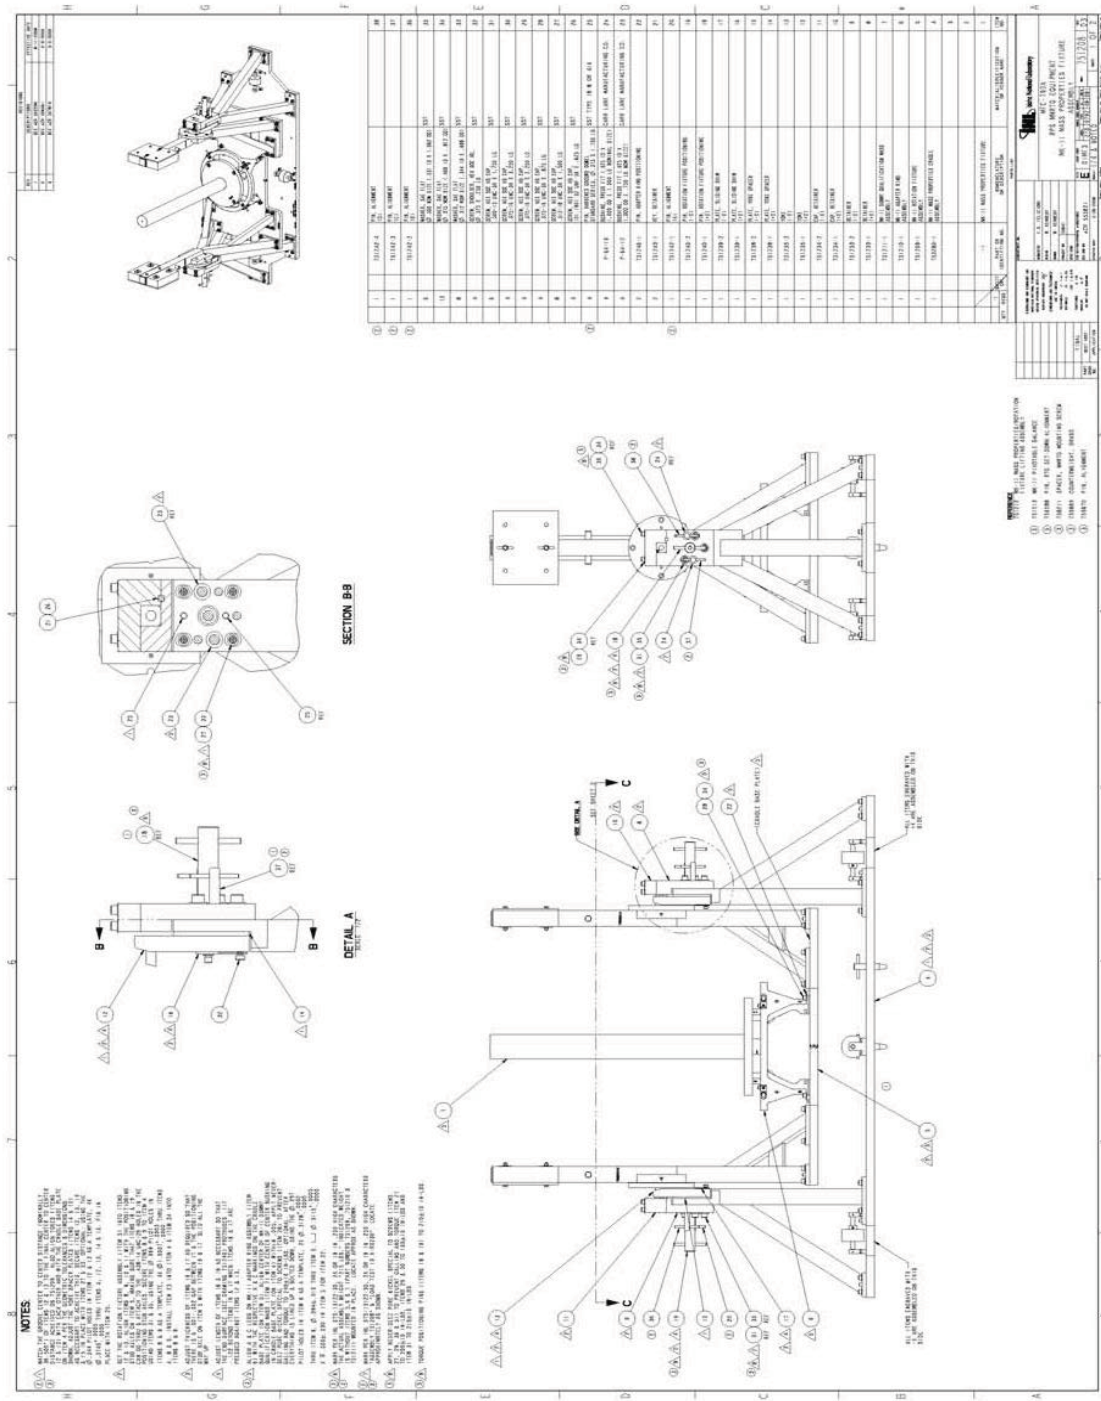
MP Mark-II mounting fixtures (mass standard shown installed)
